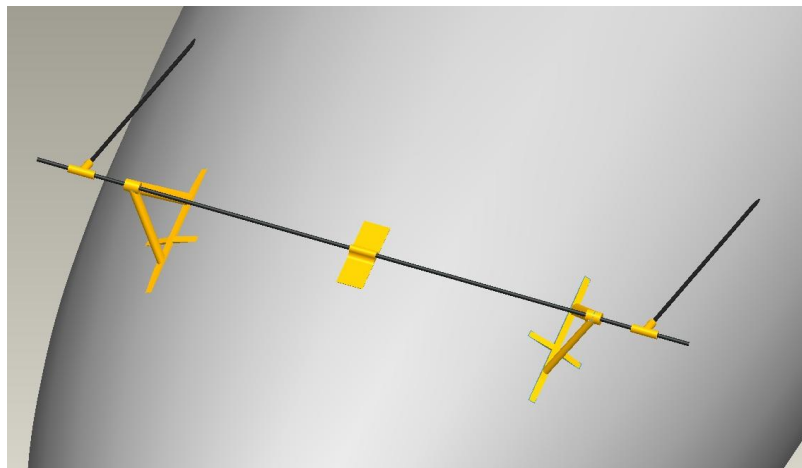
CFK rod, rod connector, rod spacer, rod fixing
